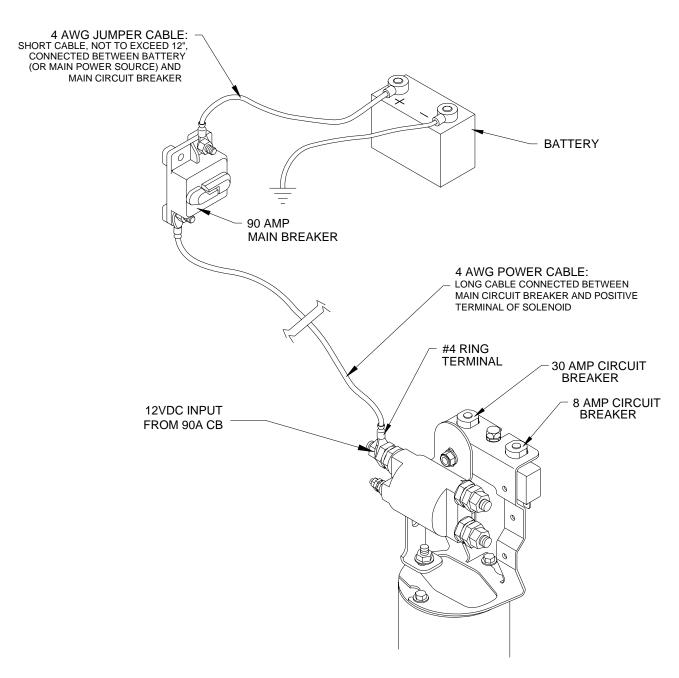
ELECTRICAL INSTALLATION DIAGRAM
